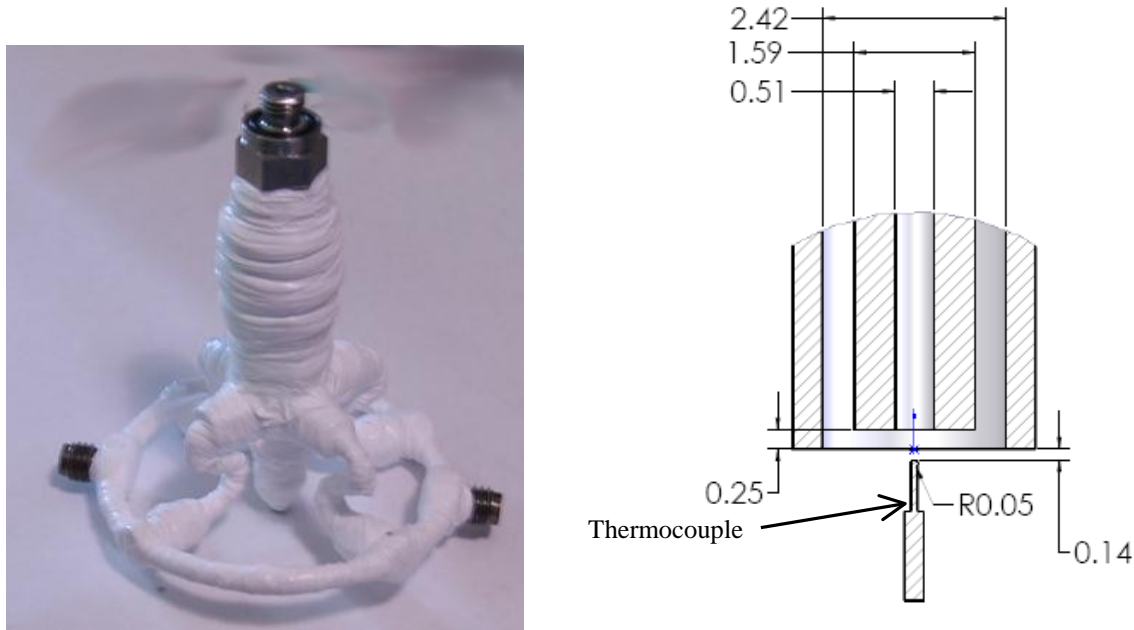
Picture of the shear-coaxial injector (left) and a cross-section drawing of the injector tip. The thermocouple used to measure exit-plane temperature profiles is shown in the drawing, indicating its relative size and the axial position at which measurements are made.
